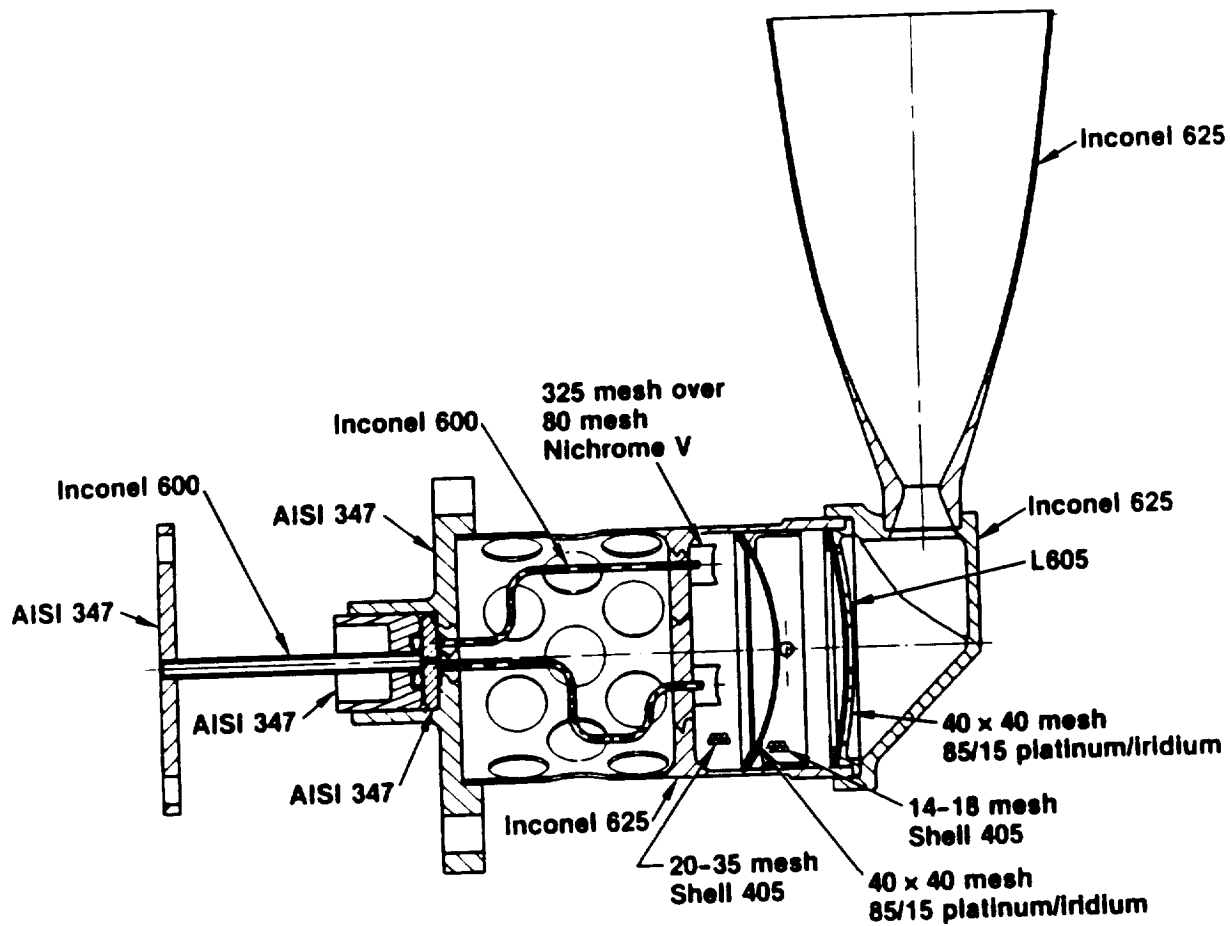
TRMM Thrust Chamber Assembly (TCA)
